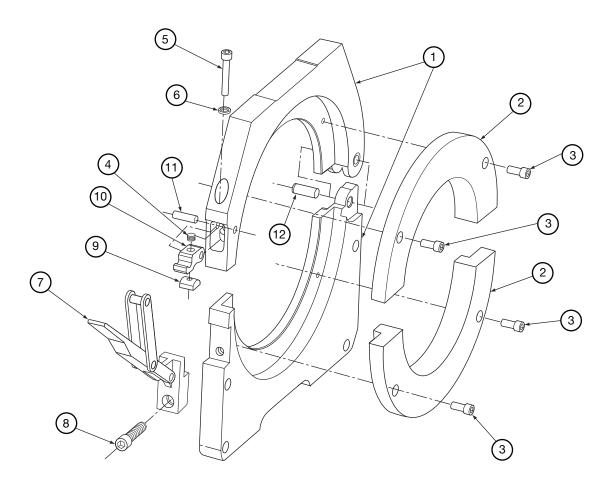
SWS-40H Fixture Side Plate Assembly – Right
